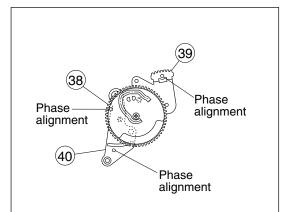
(b) Removing the Clutch Lock Lever Assembly 40
